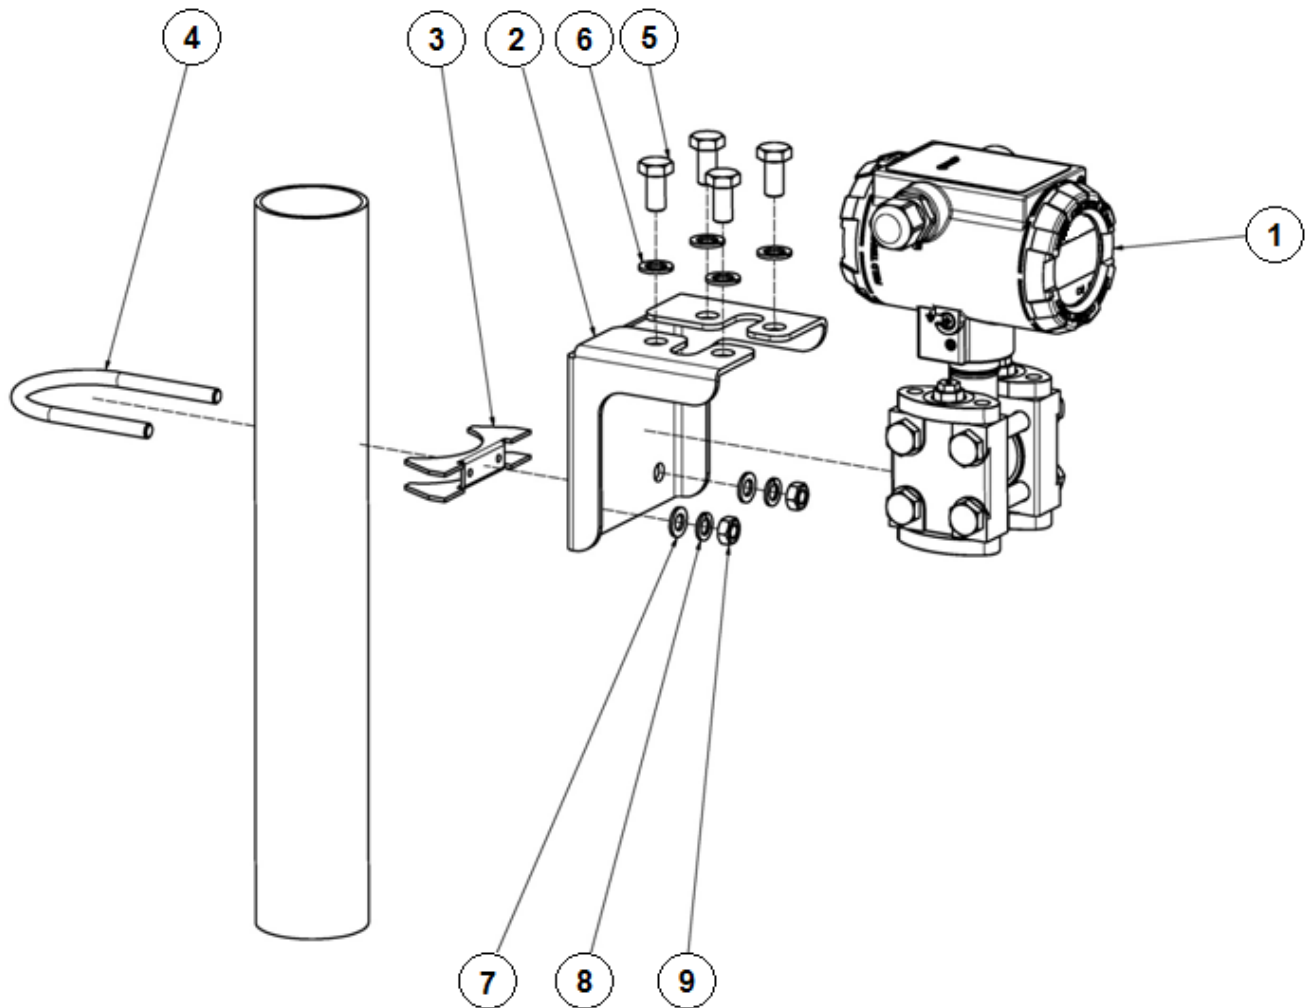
Transmitter D31 with C type connector. Mounting on pipe.
